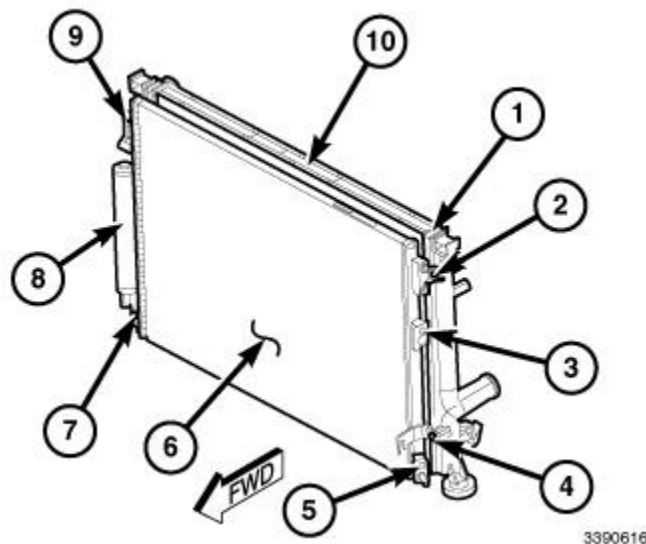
Transmission Cooler Ports, Refrigerant Line Fittings, Four Bolts, Secure A/C Condenser & Radiator
